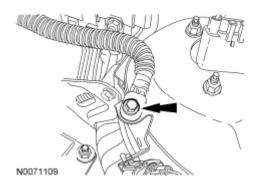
Locating Negative Battery Cable Ground And Bolt Courtesy of FORD MOTOR CO.
